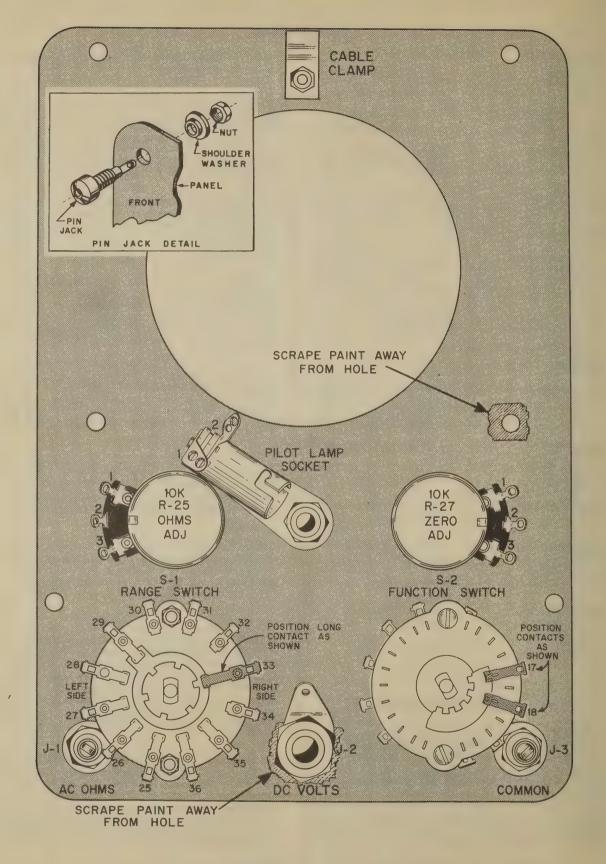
MOUNTING THE PARTS ON THE PANEL
